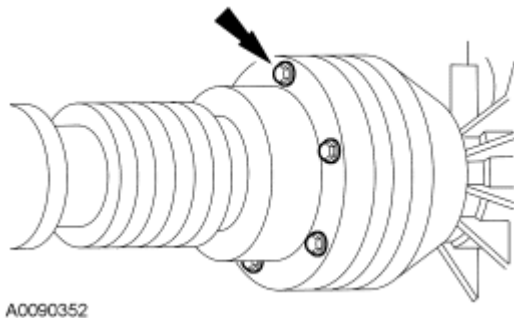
Locating Driveshaft-To-Power Take Off Bolts & Washers
